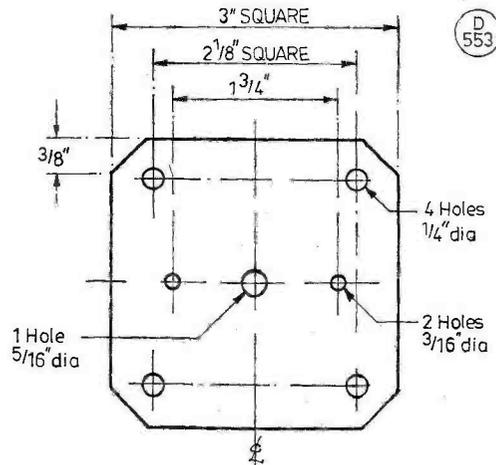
GUY PLATE DETAIL (16swg Aluminium).
